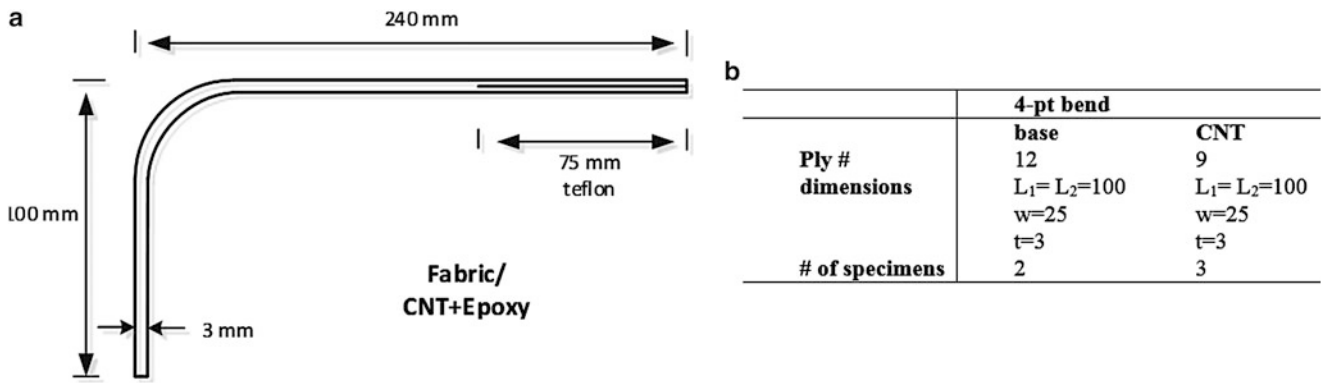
(a) Specimen manufacturing geometry, (b) numbers and dimensions of specimens used in the tests
